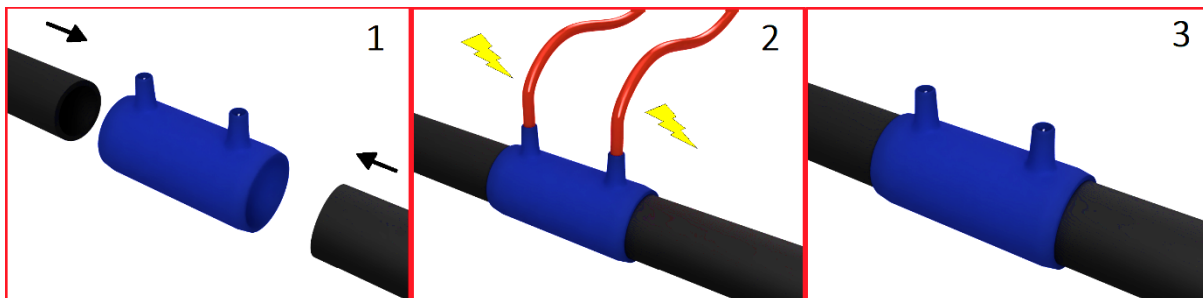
Electrofusion welding of two pipes with a socket fitting. The two pipes are inserted into the socket fitting (1) before and electrical current is applied (2), welding the pipes together (3).
